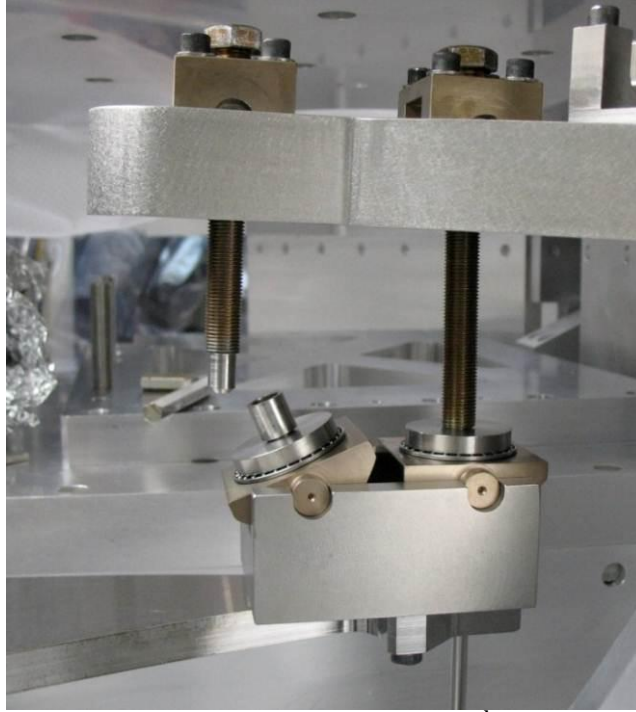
D0902464 Stage 0-1 Blade Pusher with the 2nd D0902599 Blade Pusher Bolt
